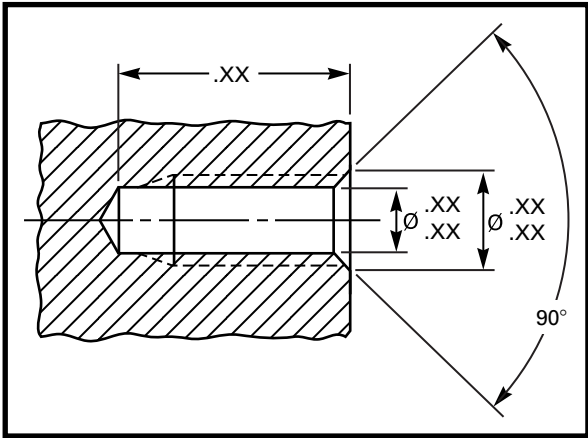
SPECIFYING INTERNAL THREAD HOLE DEPTH, SIZE, AND COUNTERSINK
